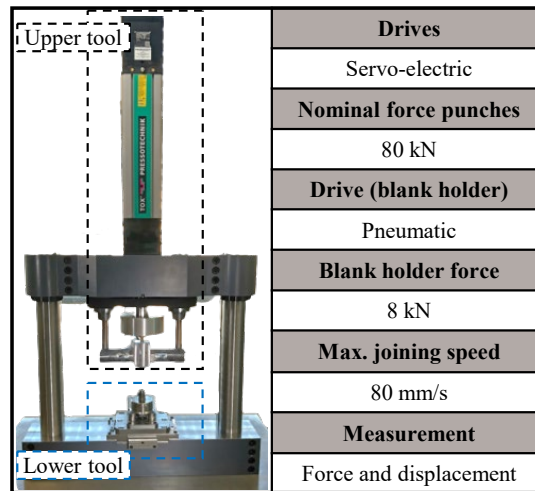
Joining system with extended punch-sided tool actuator technology to process the multi-range capable self-piercing rivets [10]
